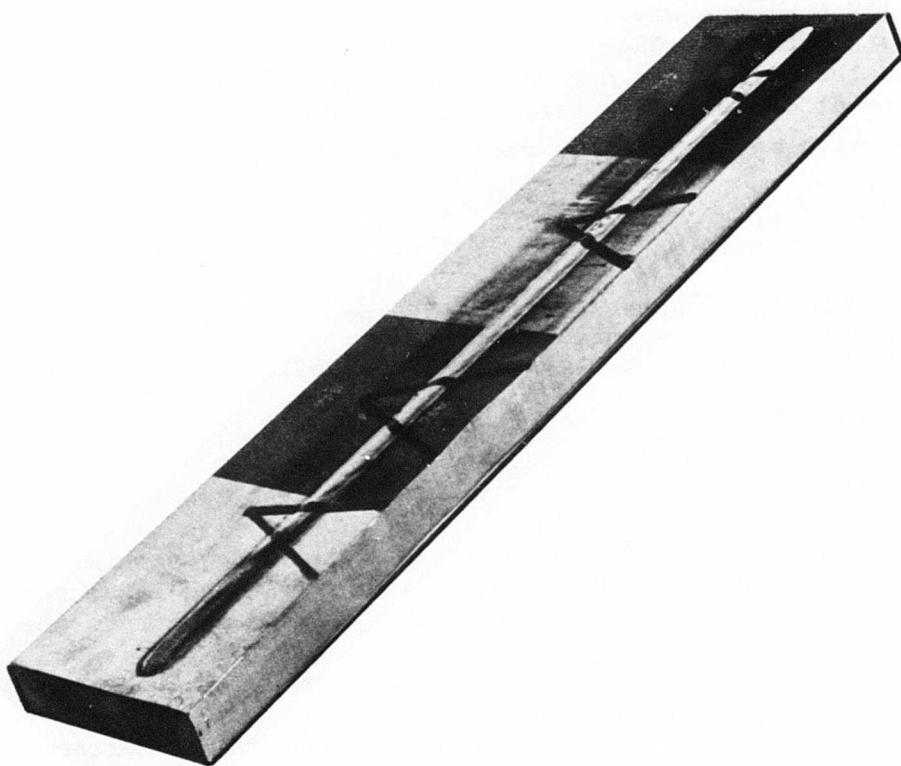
TYPICAL SURFACE FINISH TOLERANCE SPECIMEN
